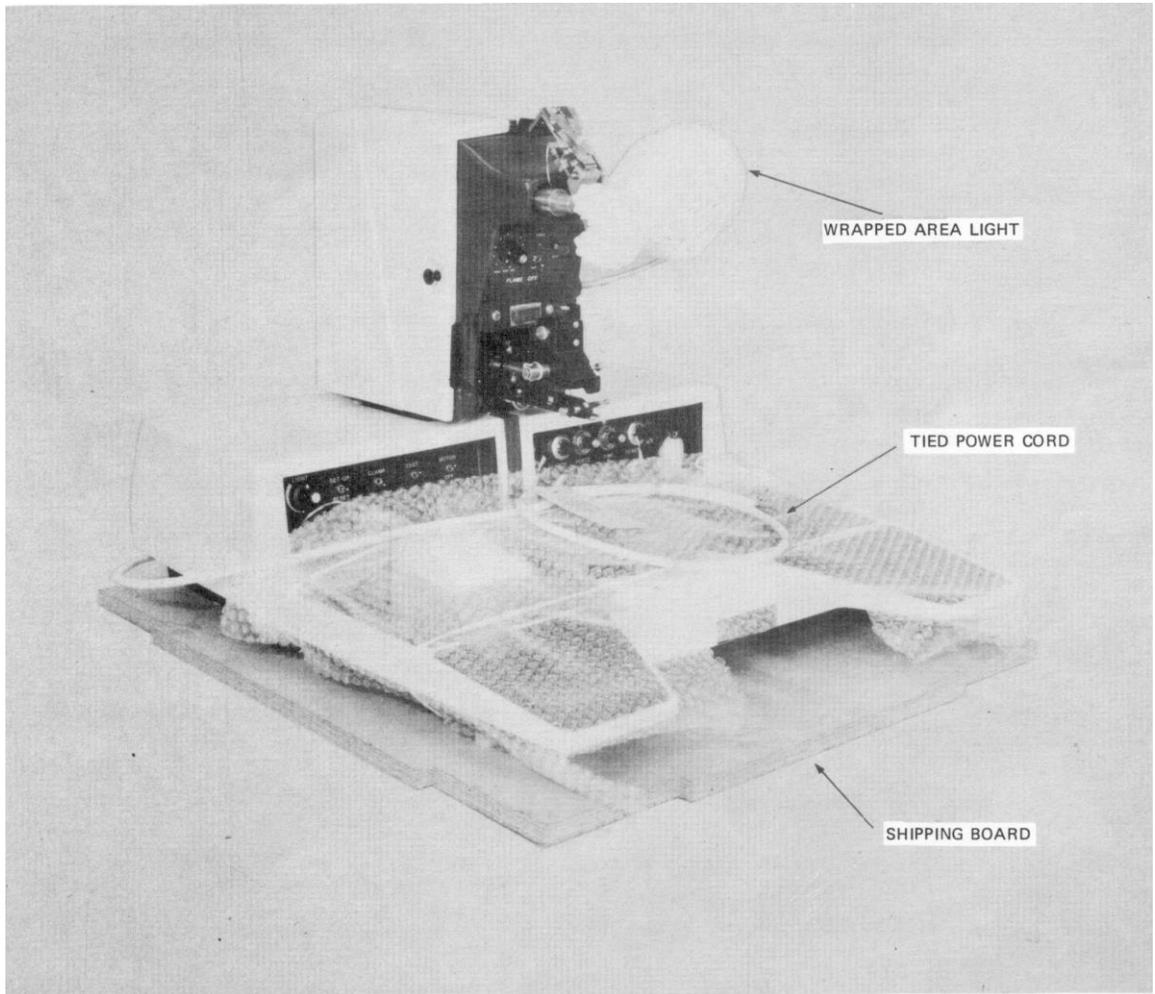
BONDER MOUNTED ON SHIPPING BOARD
